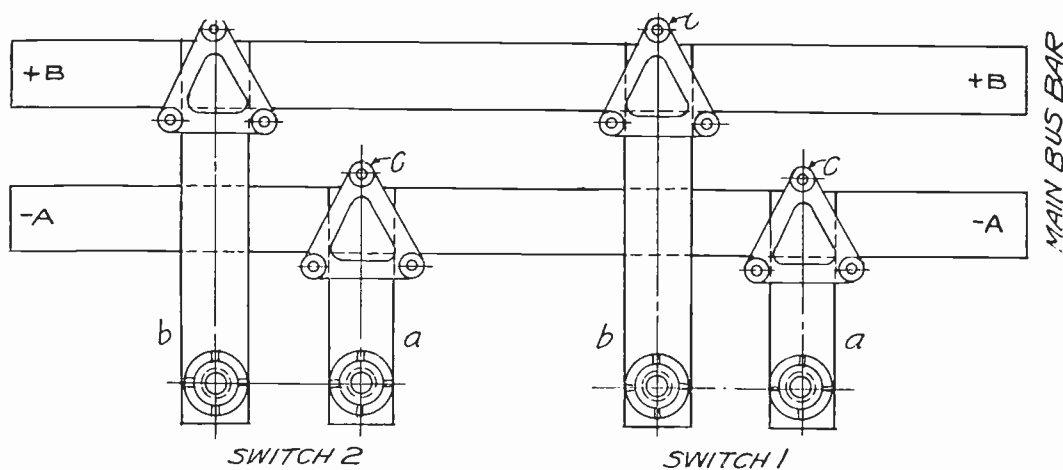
Bus bars can be connected together by means of special clamps as shown above. These clamp pieces are held securely gripped to the busses by means of short bolts through the holes in their three corners. Clamps of this type save the trouble of drilling the copper busses.
